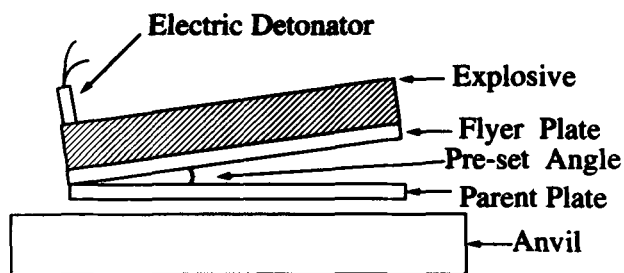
Schematic illustration of experimental assembly for explosive welding.
